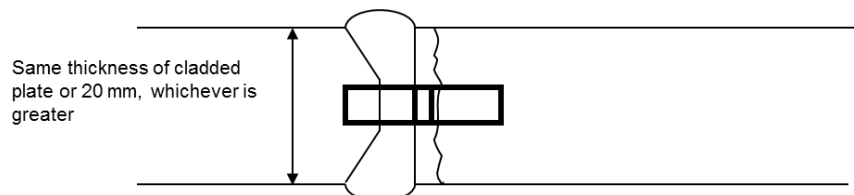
Location for removal of CVN specimens from butt weld joints
